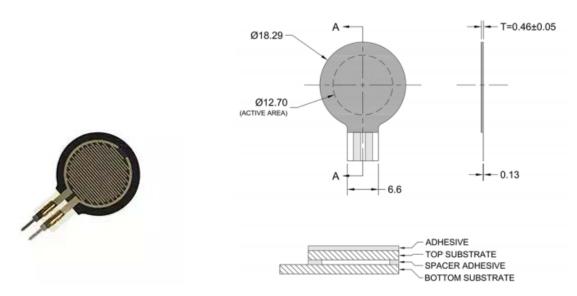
a) Force sensor resistor used in final prototype, b) Sensor mechanical data
